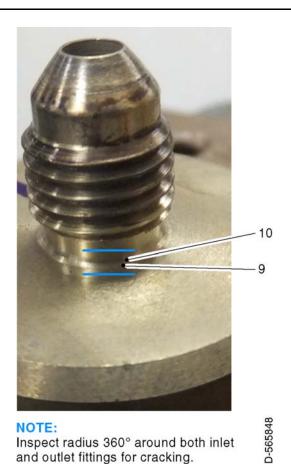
(Sheet 1 of 1) PC Filter Fitting
